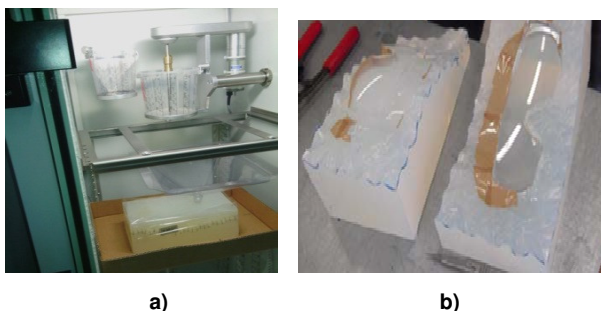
a) Positioning a silicone mould in a vacuum chamber and b) Separated silicone mould
